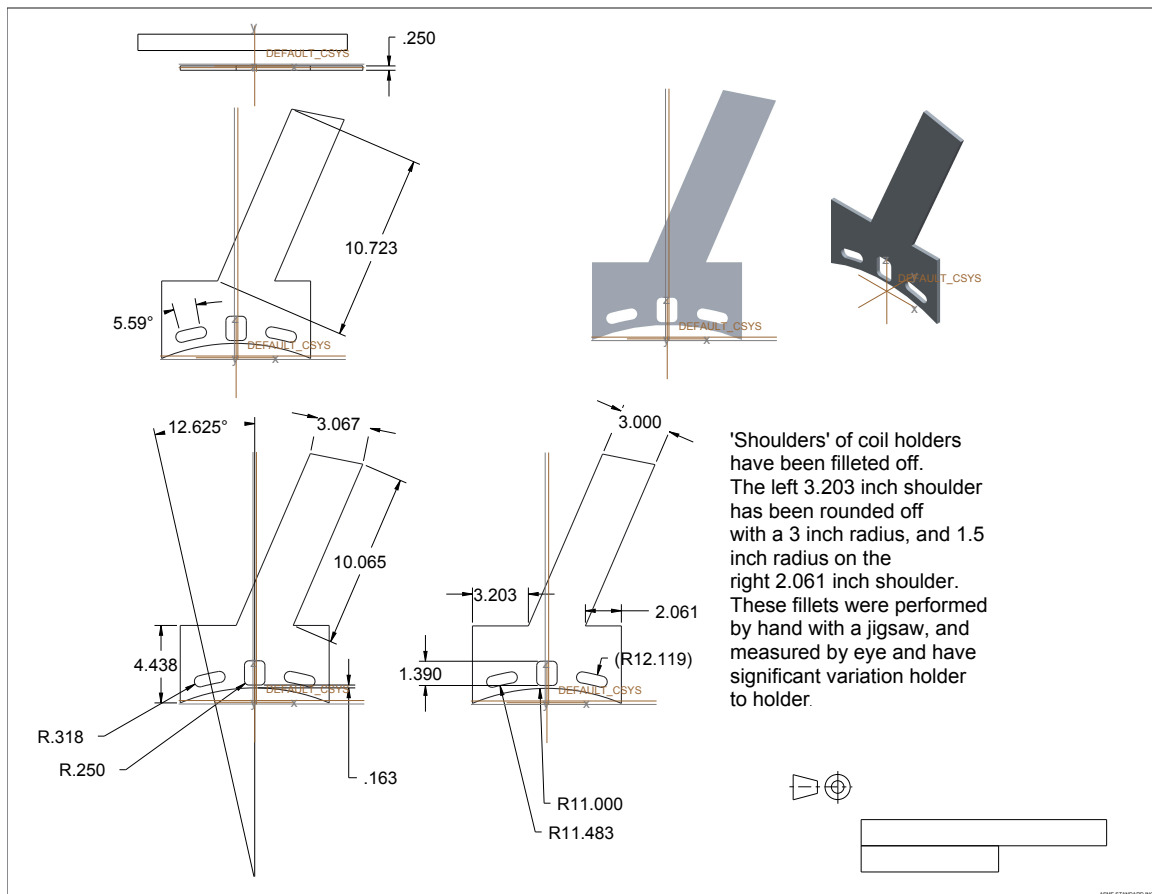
CAD Drawing of the coil holder. Tapped holes for mounting to TF case not shown.
